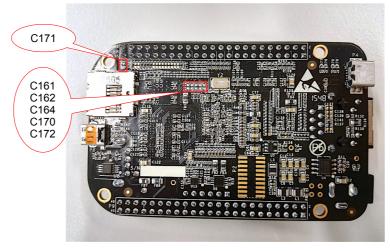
Marked capacitors are removed/disassembled from the Beagle Bone board bottom side
